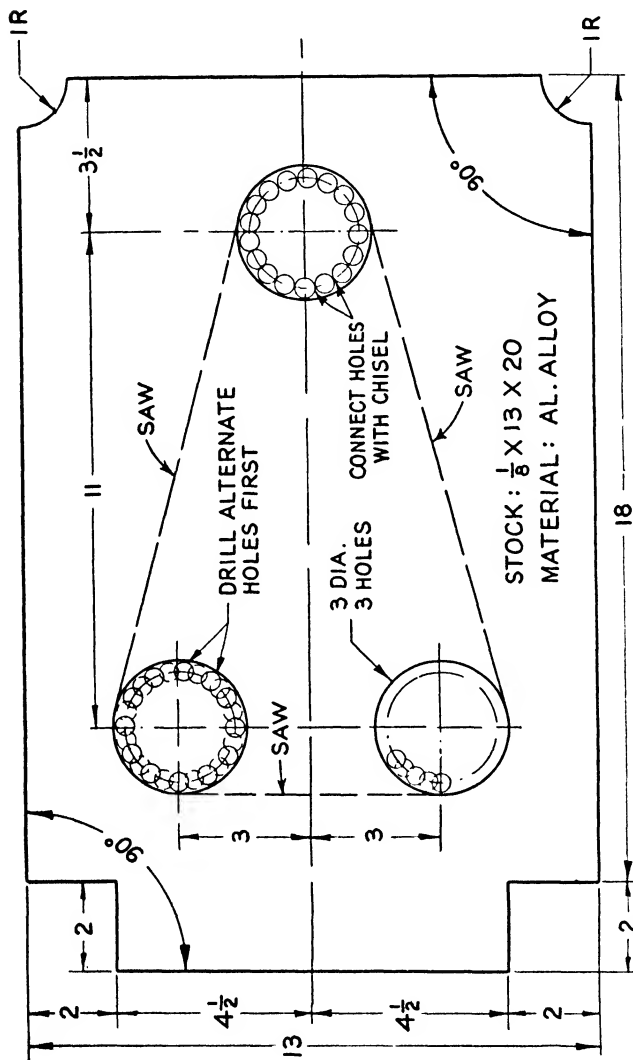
Proper procedure in drilling large holes. One important point to remember is to avoid drilling the small holes too close to circumference of large hole. After the small holes are being drilled, a sharp chisel should be used to connect the holes and the excess material should then be removed by a suitable half-round file. The sequence of operations are: *A*, squaring up stock; *B*, layout and work holes and cut-outs; *C*, cut and drill out corners according to specifications; *D*, drill out the 3 in. diameter holes if a 3 in. hole saw be not available. Drill a series of No. 30 holes which over-lap each other and remove the entire stock, then file to the scribed line; *E*, finally, saw connecting line between holes as marked. *Note*.—Be careful not to scratch stock during process of operation.
